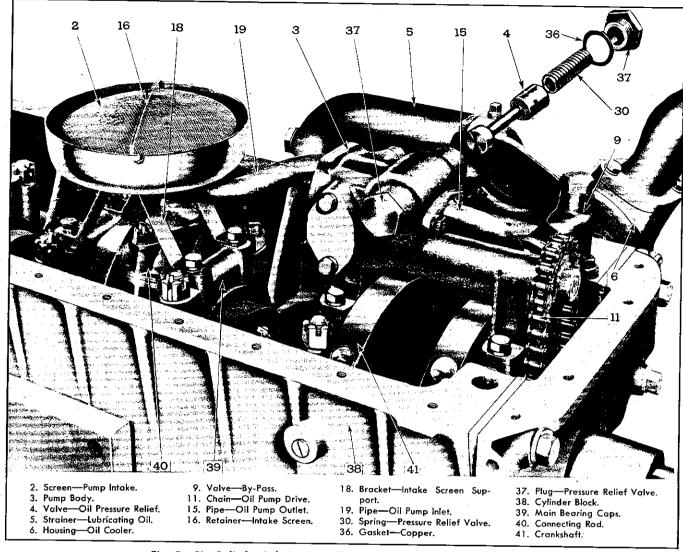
Six Cylinder Lubricating Oil Pump Mounting—With Chain Drive.
